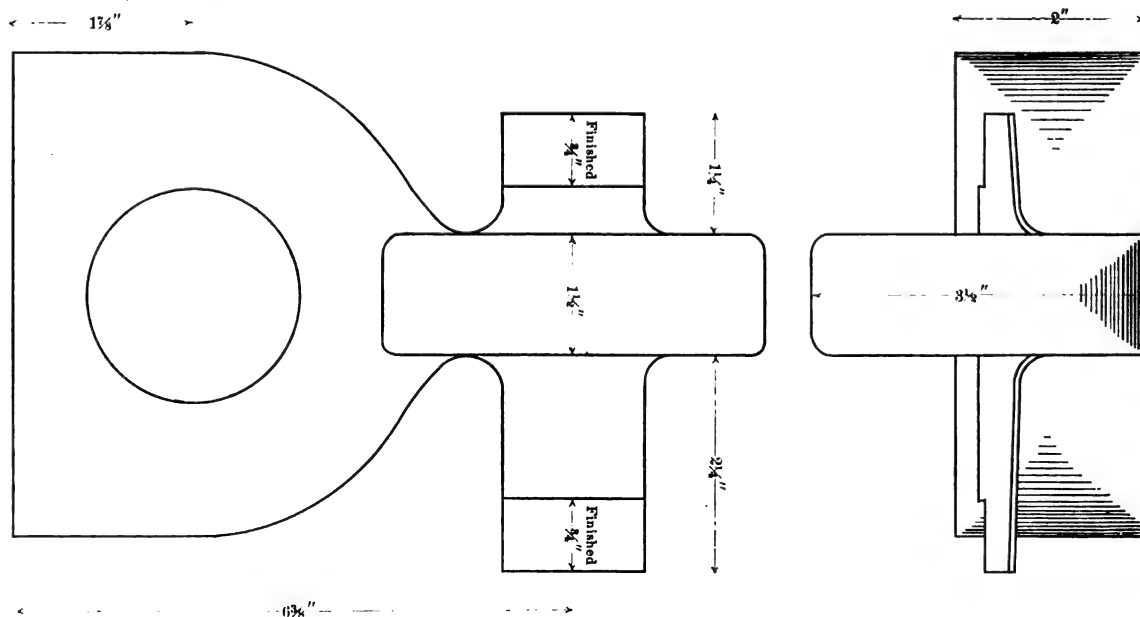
PLAN VIEW OF POLE-PIECE.
